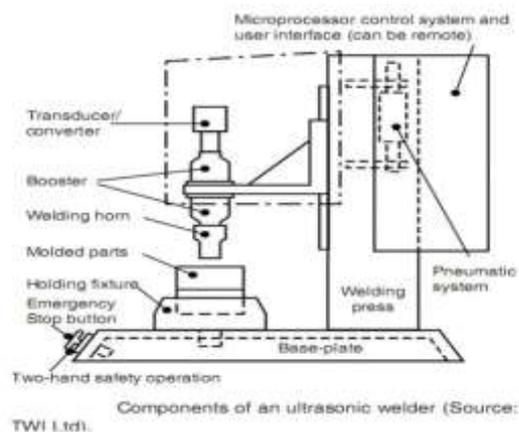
Skematic Diagram Of Ultrasonic Welding
